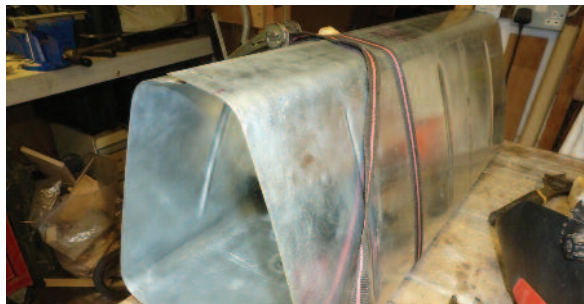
Fuel pipe bosses welded from inside the tank.
